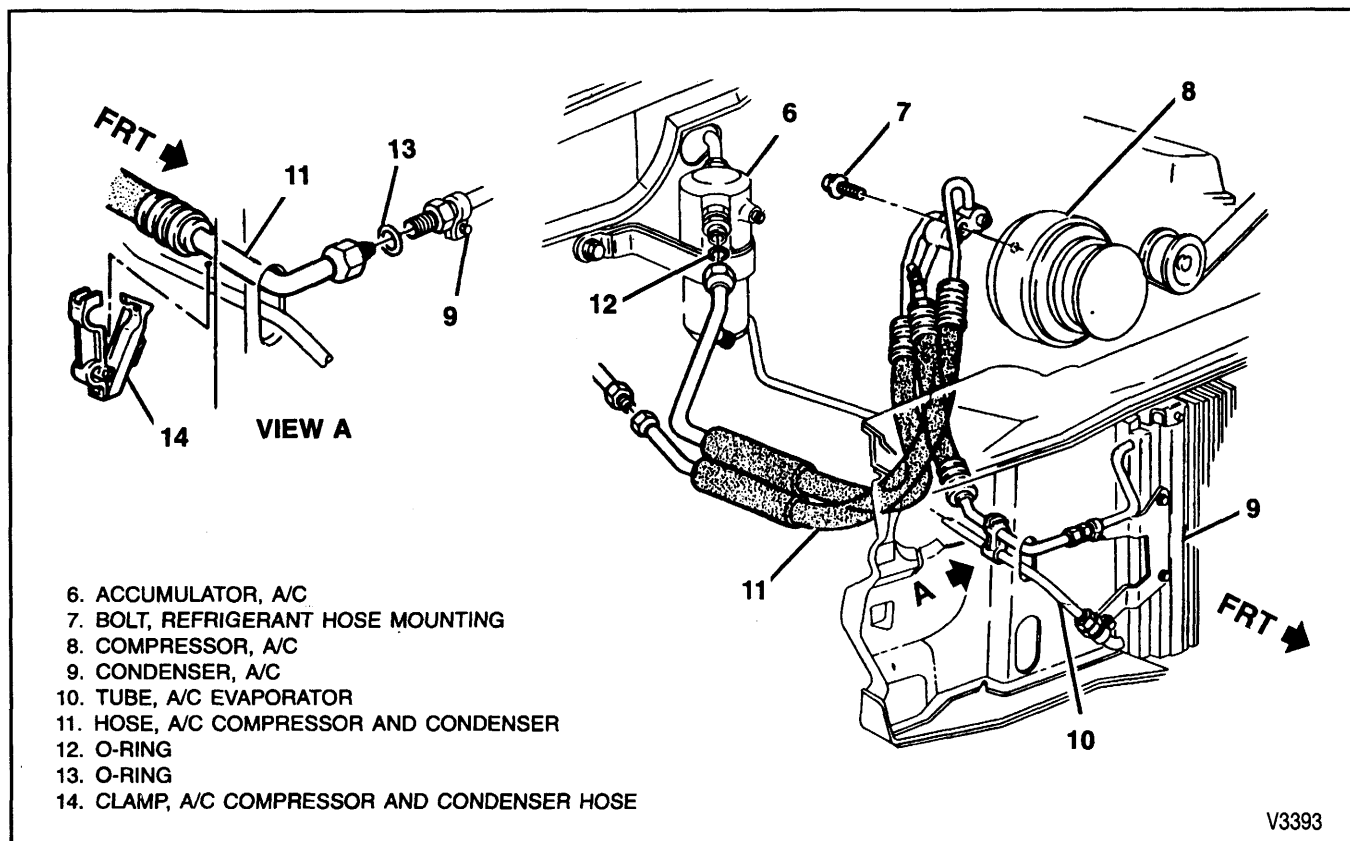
Compressor and Condenser Hose Assembly (5.7L Engines)
